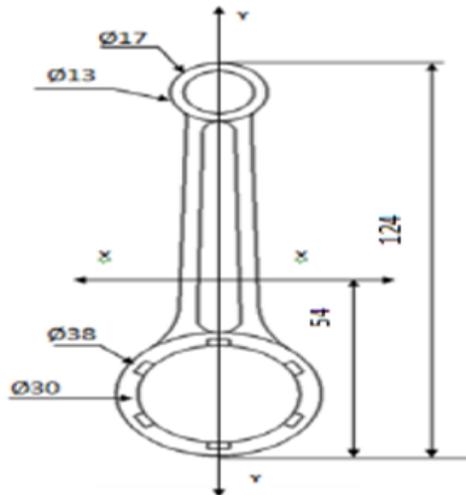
Dimensions for Bajaj Pulsar 150cc Engine connecting rod
